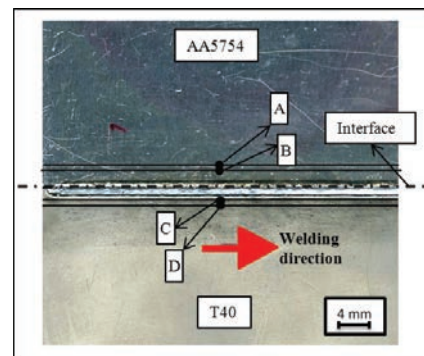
Position of thermocouples for dissimilar weld.
